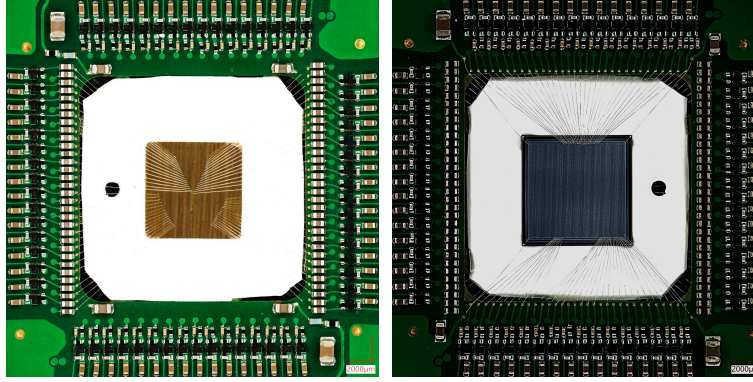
Top and bottom views of the double-sided LGAD prototype mounted on a dedicated readout PCB. The assembly incorporates integrated AC coupling, bias resistors, and two-stage amplification for both signal paths.
